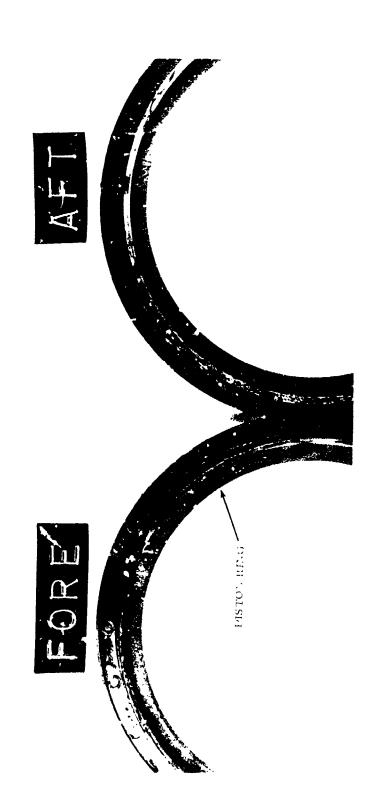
Self-Acting Face Seal, Piston Ring Carrier After Test 10.
